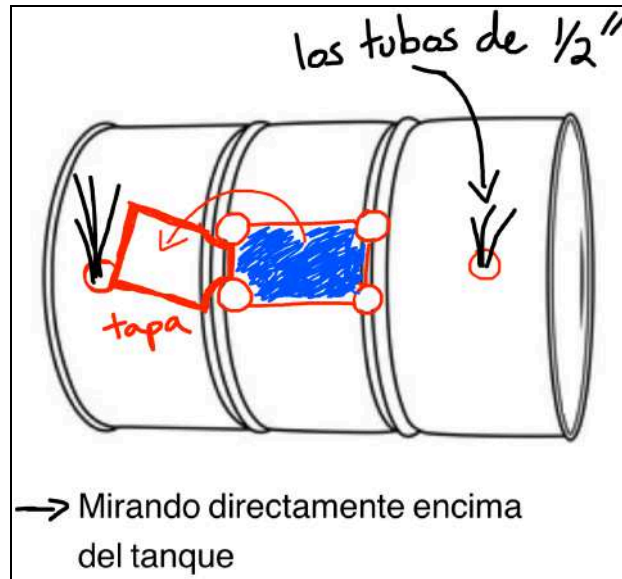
Sketch of the 55 gallon drum with a 2" hole drilled into the side without a cap already. Image is not to scale.<sup>5</sup>
